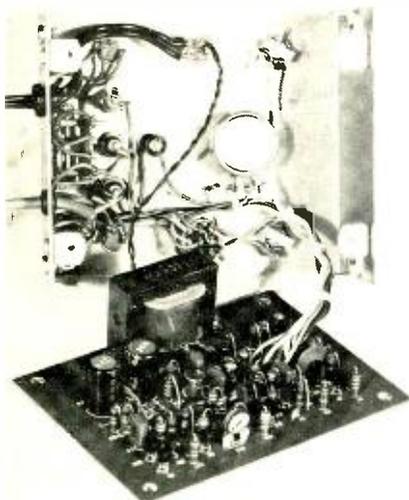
INSIDE VIEW of the completed Transistor Curve Generator. An 8-conductor cable is used between the circuit board assembly and the front panel.
